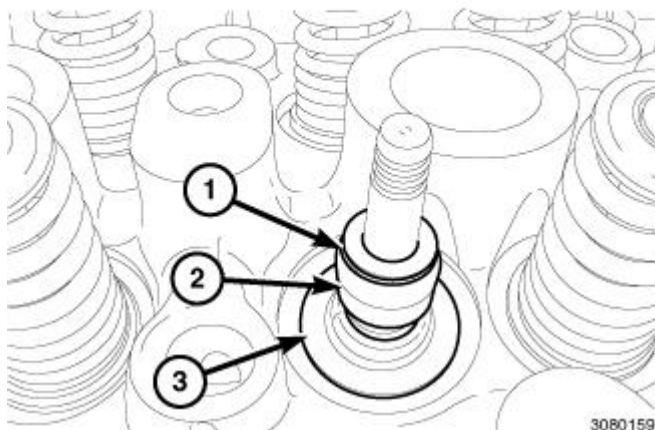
Garter Spring, Valve Guide Seal & Spring Seat
